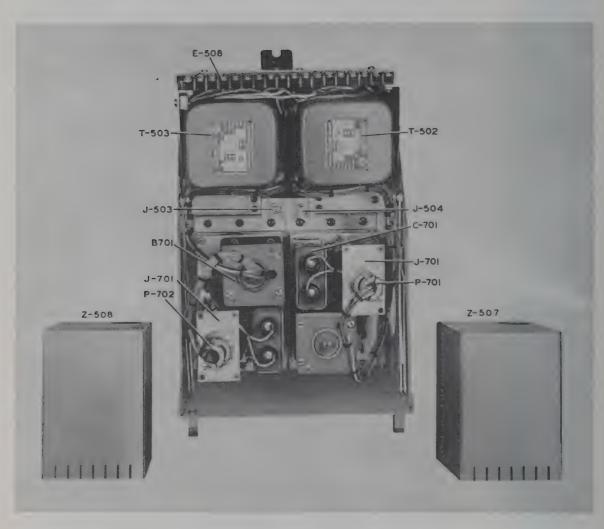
Radio Transmitter T-454/FRT-26, Buffer, Multiplier, and Driver Unit, Bottom View.
